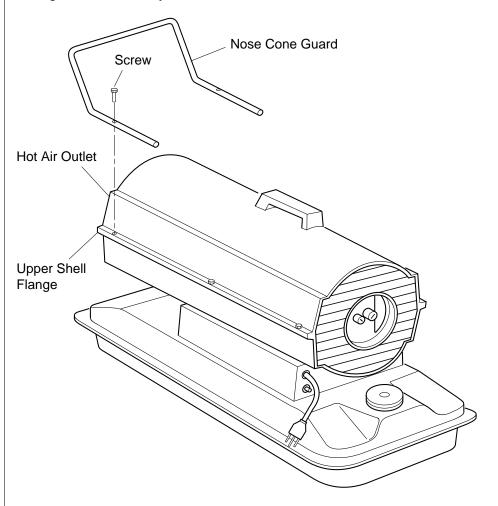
Nose Cone Guard Assembly, 35/50/70 Models Only
